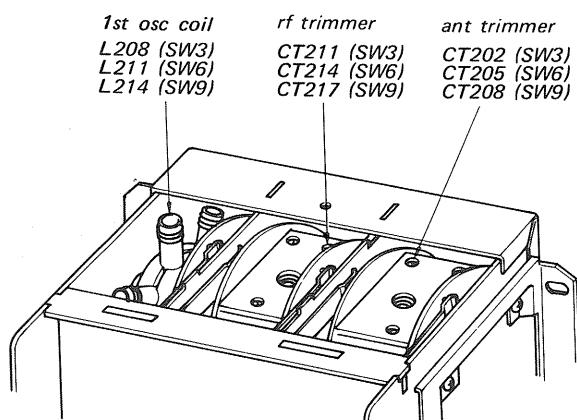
Adjusting parts for SW3, SW6, SW9
